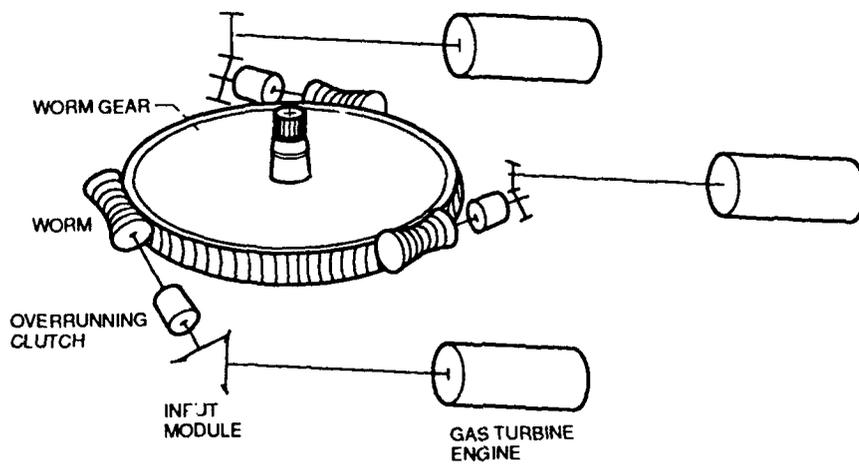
Three engines and hydrostatic worm gearing helicopter transmission.
